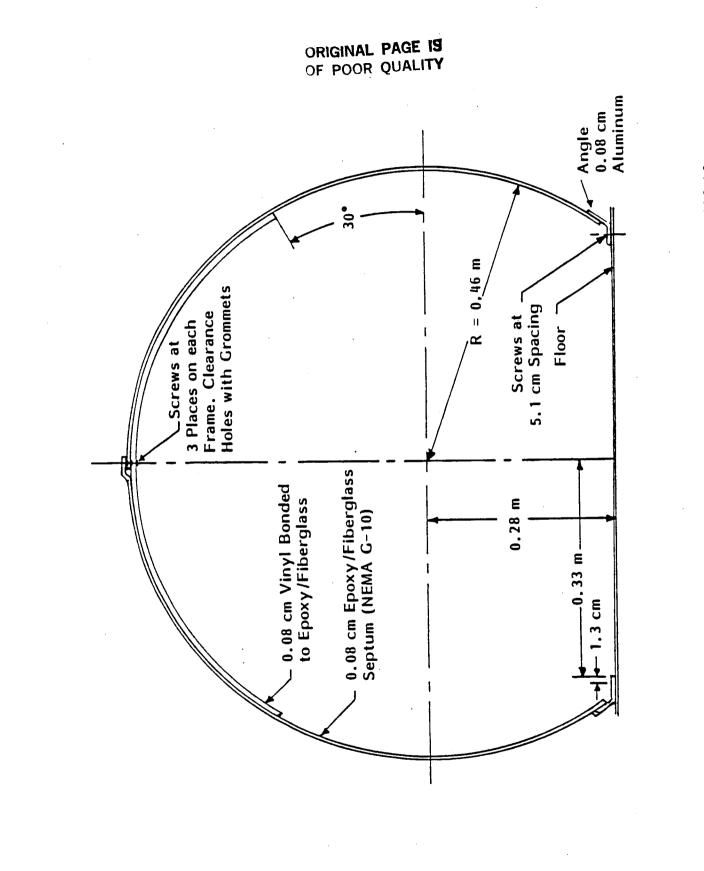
FLOOR ASSEMBLY [1] (Dimensions in meters) -13-
